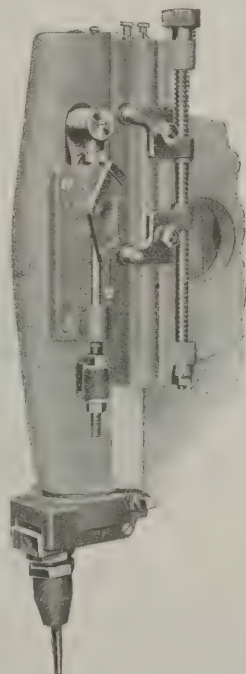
Detail View of Shaper Ram showing Relief Mechanism
